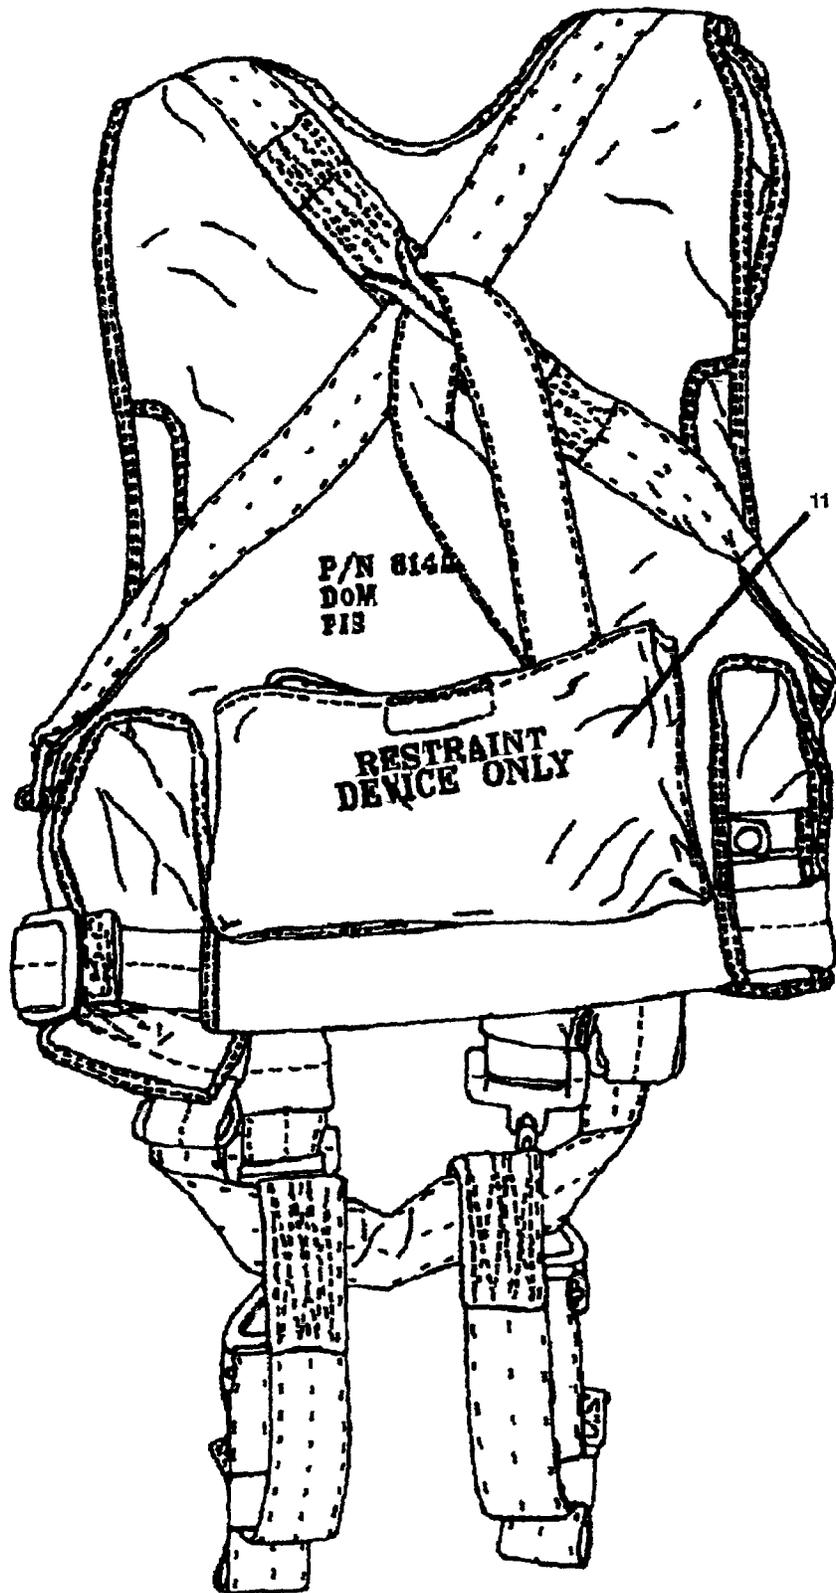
Crew Restraint Harness Assembly (Sheet 2 of 4)
